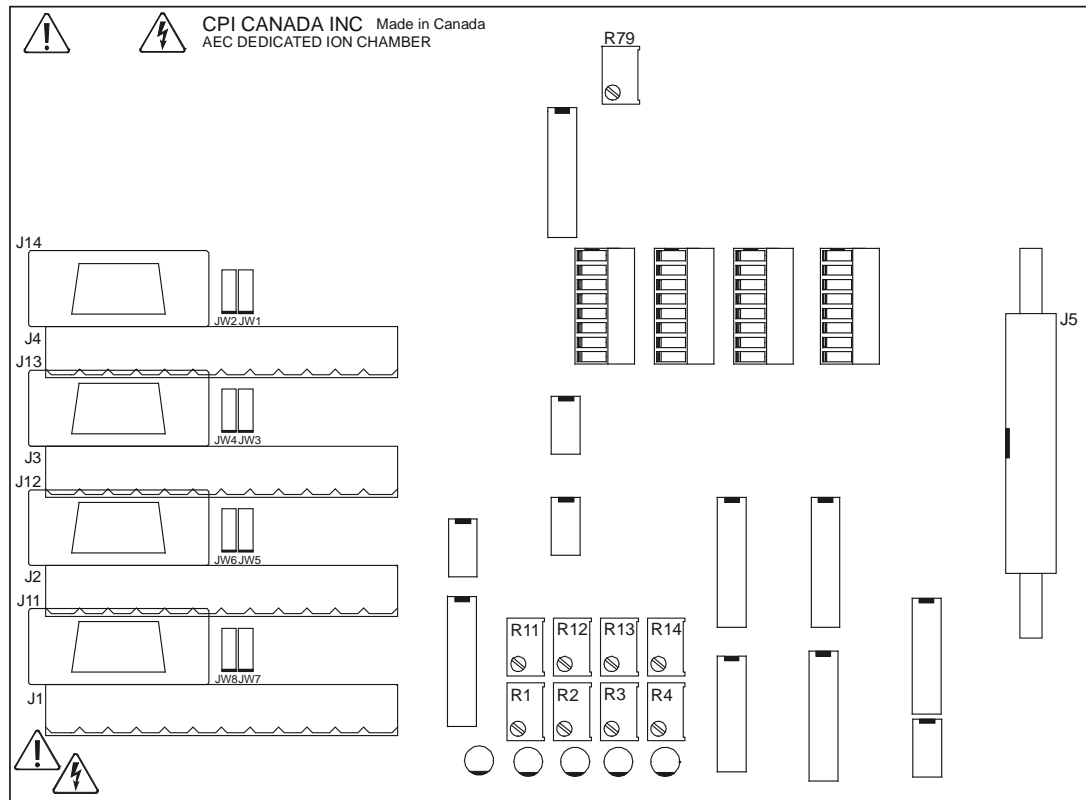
Dedicated ion chamber AEC board (assembly 734614)
